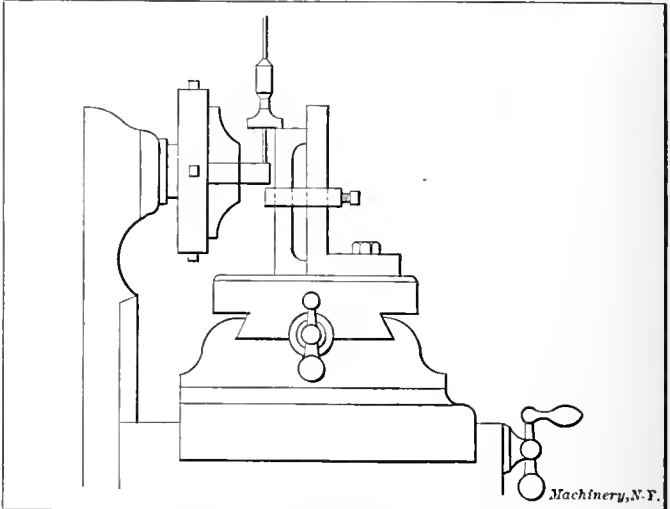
Setting Jig-plate by measuring to Turned Plug with Depth Gage
